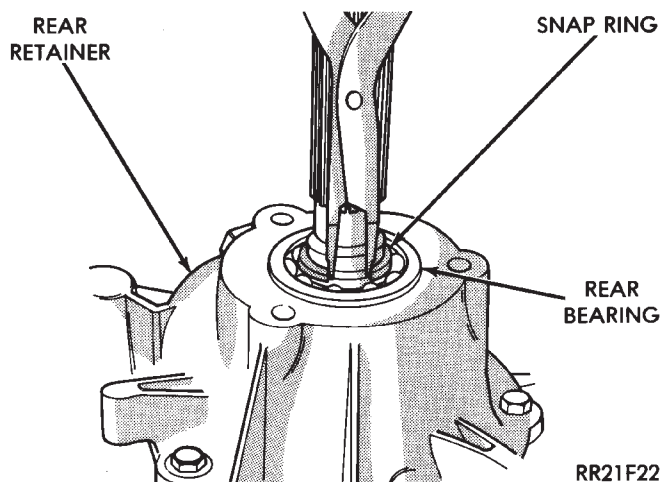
Installing Output (Rear) Bearing Snap Ring
